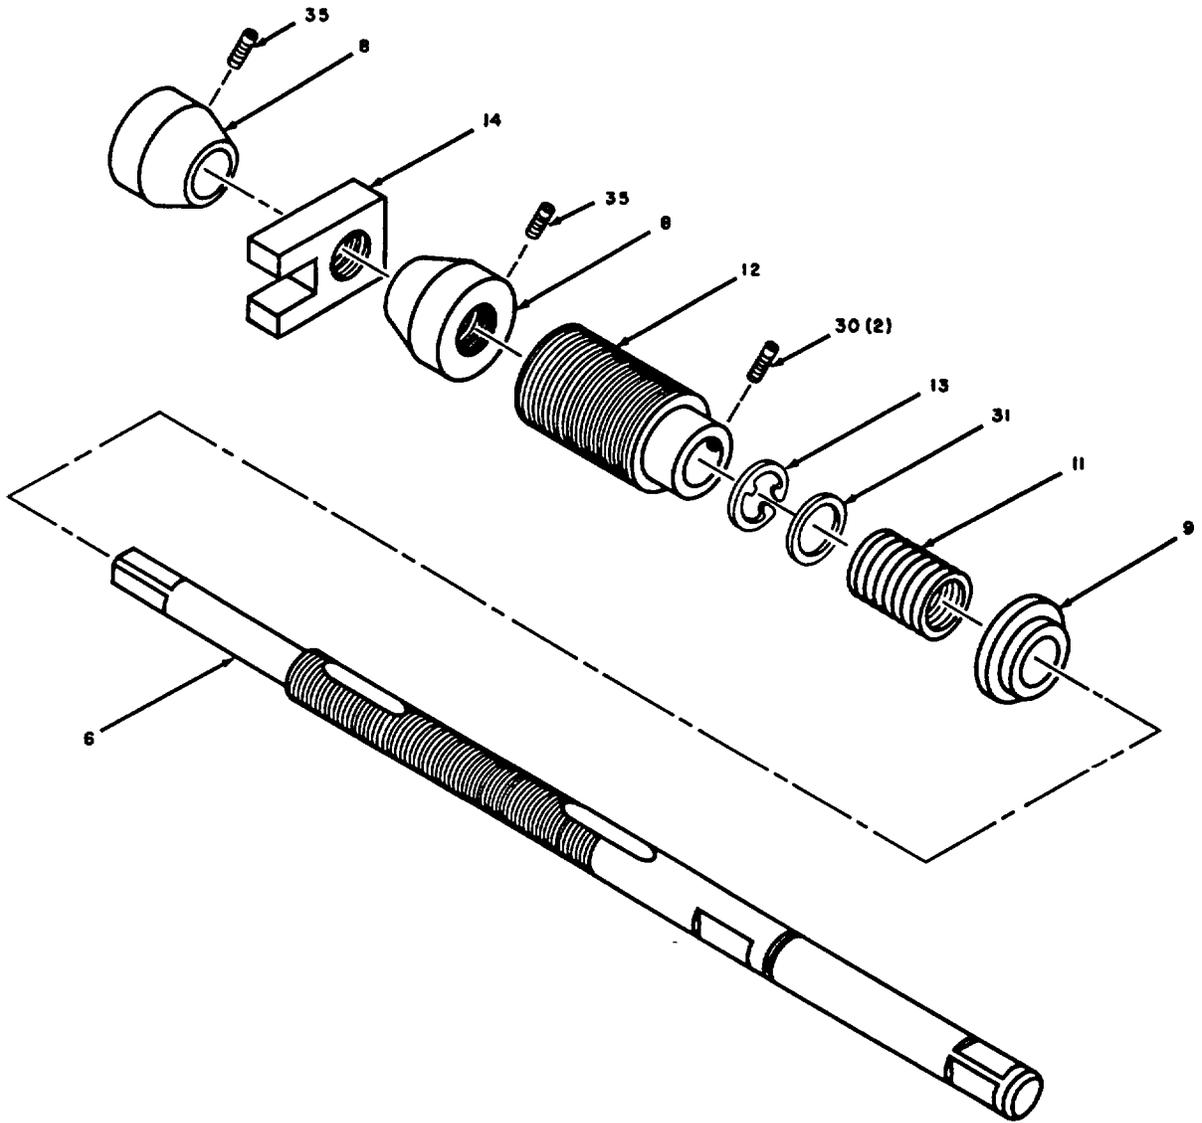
(1). Coarse tuning drive assembly, exploded view (sheet 1 of 2).
